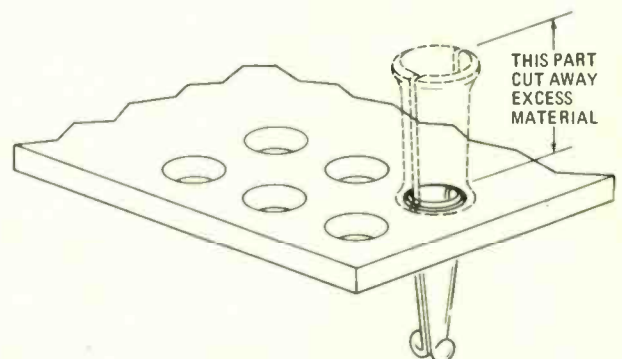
HOW FLUSH-MOUNT SOCKET CAN BE MADE by removing the top part of a miniature tubular terminal and peening over.
